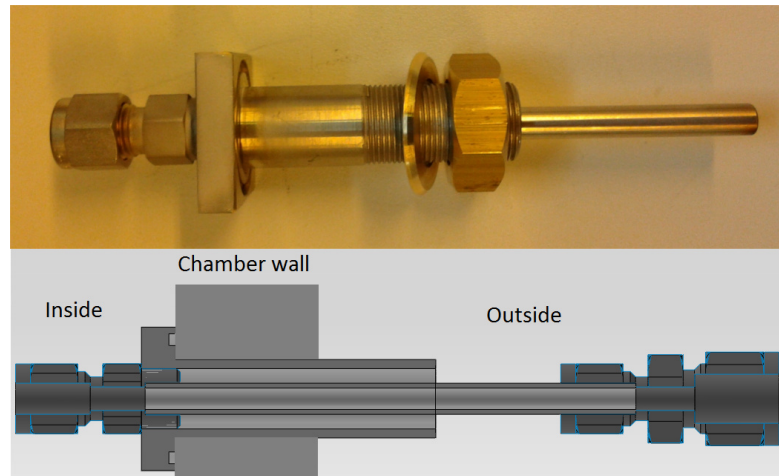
Metal feed-trough sockets for the cooling transportation and drawing of the mounting to the chamber wall.
